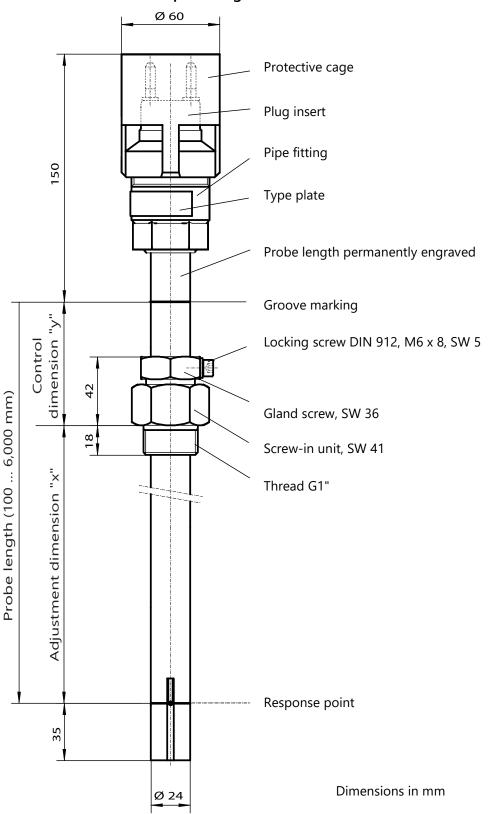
Overfill Prevention Sensor 83 UV with pipe fitting
